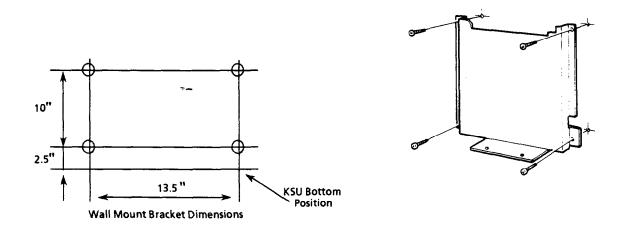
Attaching the Wall Mount Bracket of the Level II Basic KSU to the Wall
